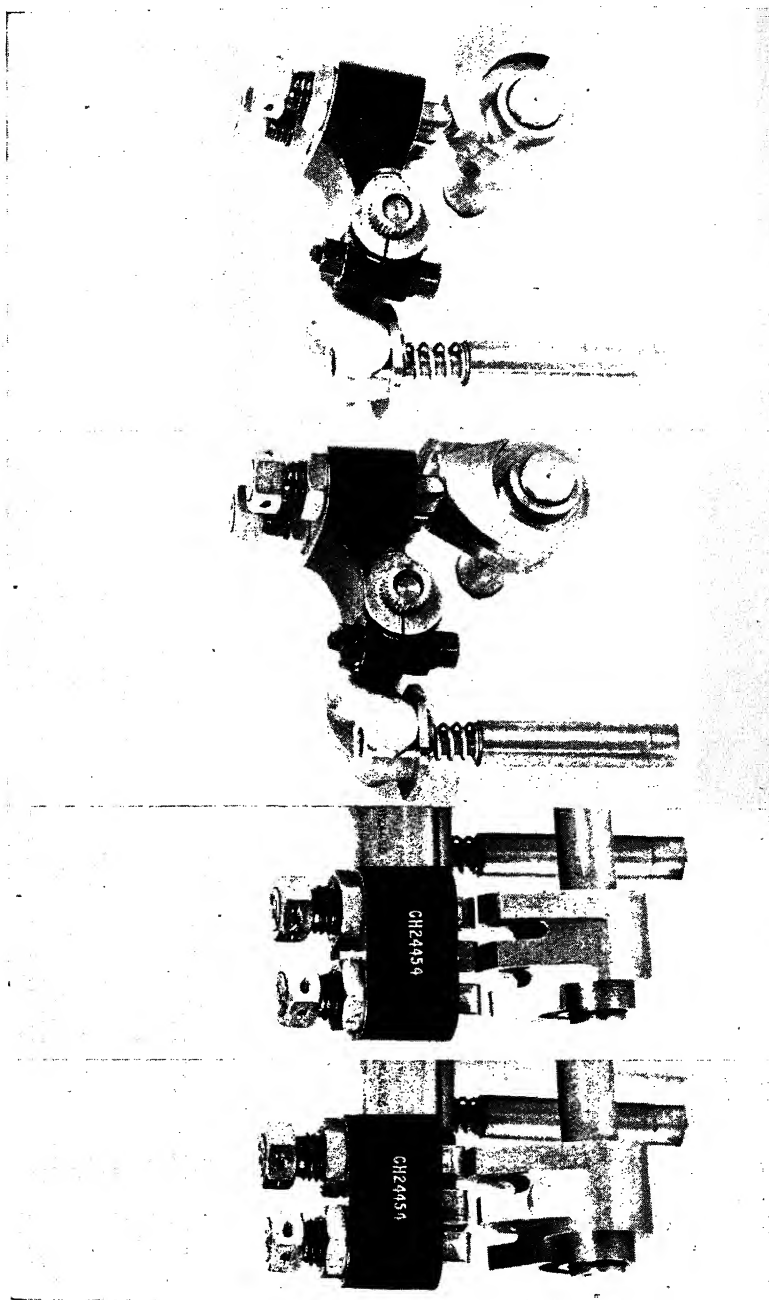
A.—ACTUAL THREE-PHASE BOOST-CONTROL PARTS
